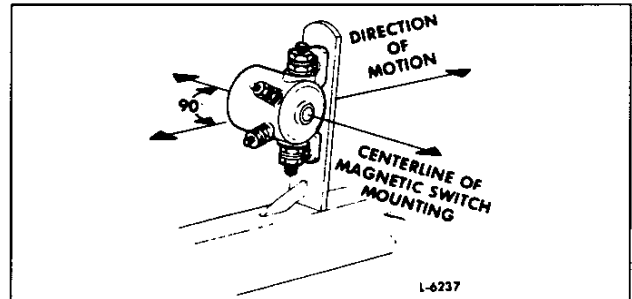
Starter Auxiliary Magnetic Switch Mounting
